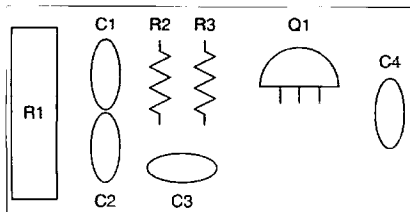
Suggested parts placement on a 1" x 3" perf board. Use hook-up wire to connect the points. Place R1 so that the screw is accessible.
